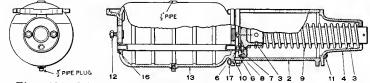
8 in. by 12 in. Freight Brake Cylinder and Auxiliary Reservoir Combined.
